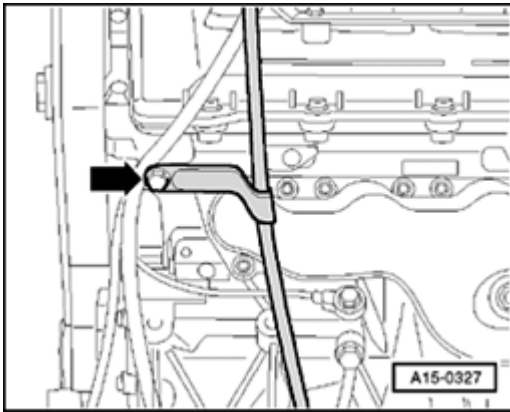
Removing Guide Pipe For Oil Dipstick From Cylinder Head
